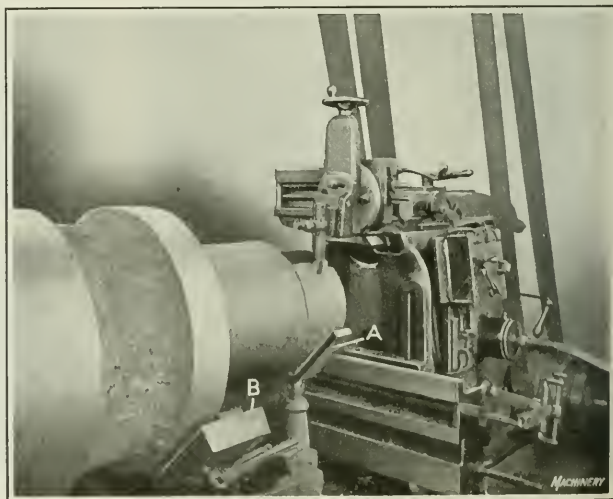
How a Traverse-head Shaper is used for cutting Integral Key
